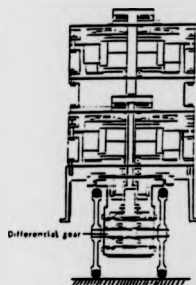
Differential wheel assembly design (Moravec'83).
